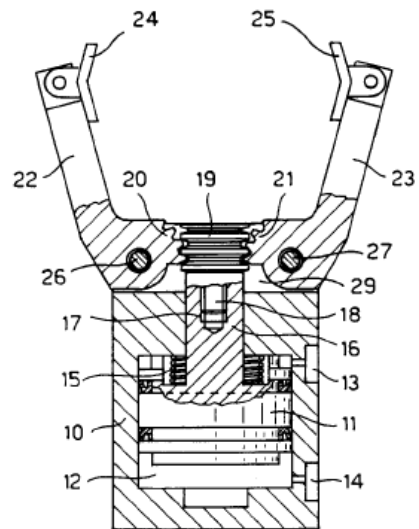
Patent of a piston-cylinder actuated gripping device [58]. When air is supplied through the inlet (14) to the lower chamber (12), the piston (16+17+18) will move upwards. The gear (19) will cause the grippers to move (20+21). When air is supplied through the inlet (13) to the upper chamber (11), the grippers will close.
